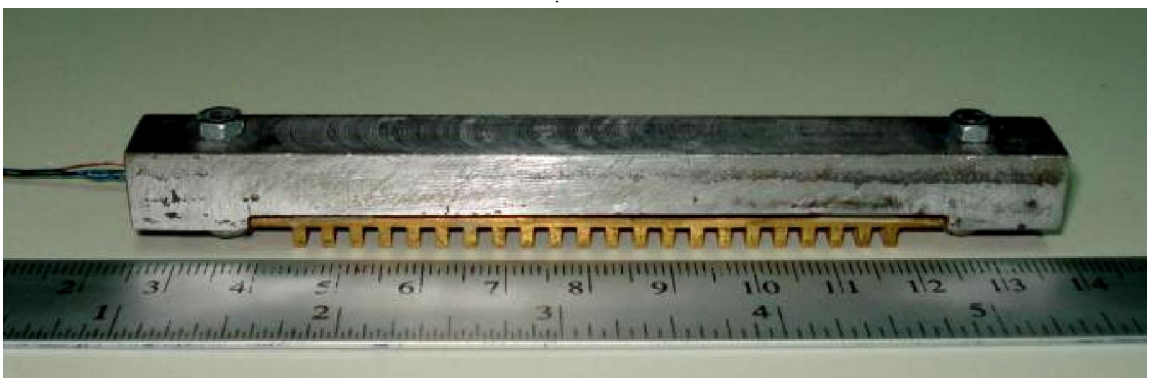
Full assembly linear motor with the fixed support and the pre-load.
